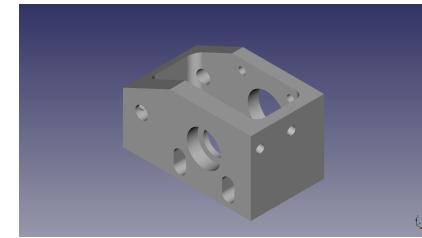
Begonia 3D Printed Lower Z Right Render
